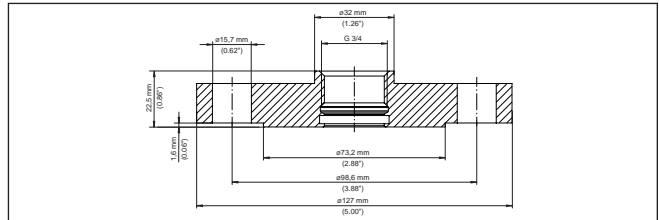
Dimensions of threaded adapter G¾ (DIN 3852-X) on flange 1½" (ASME B16.5, RF) 150 lb
